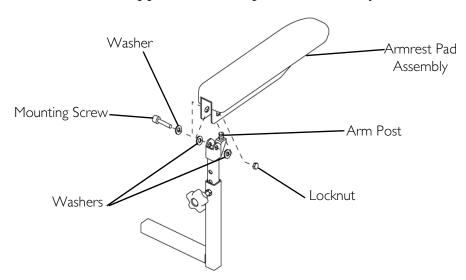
Replacing Van Seat Armrest Pad Assembly (Wheelchairs Built After October 2003)
